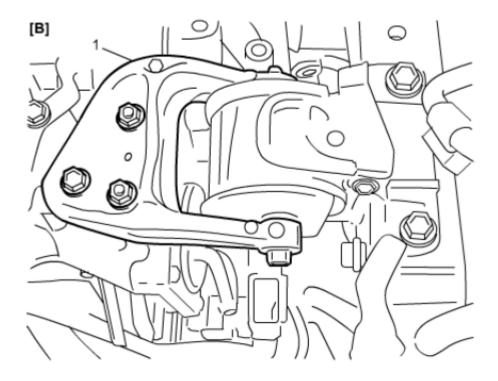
Identifying Suspension Frame And Engine Assembly Courtesy of SUZUKI OF AMERICA CORP.
